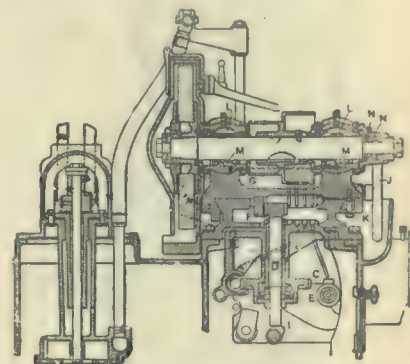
Section Through Grinding Wheel Spindle, Showing Gearing Feeding the Wheel to the Work.
